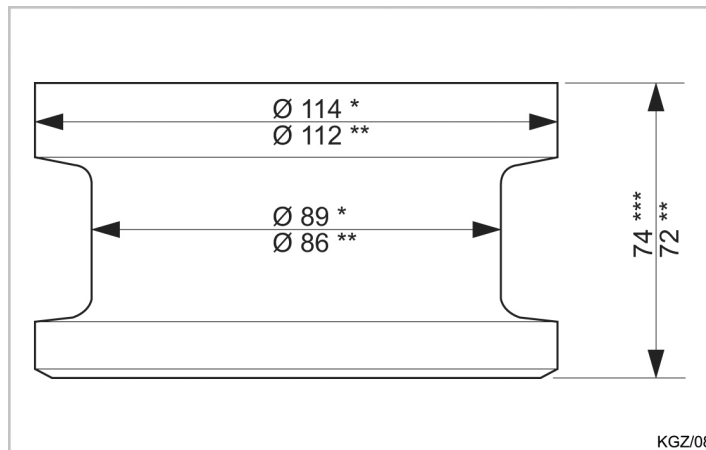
New and wear dimensions for kingpin 90 (3.5")
